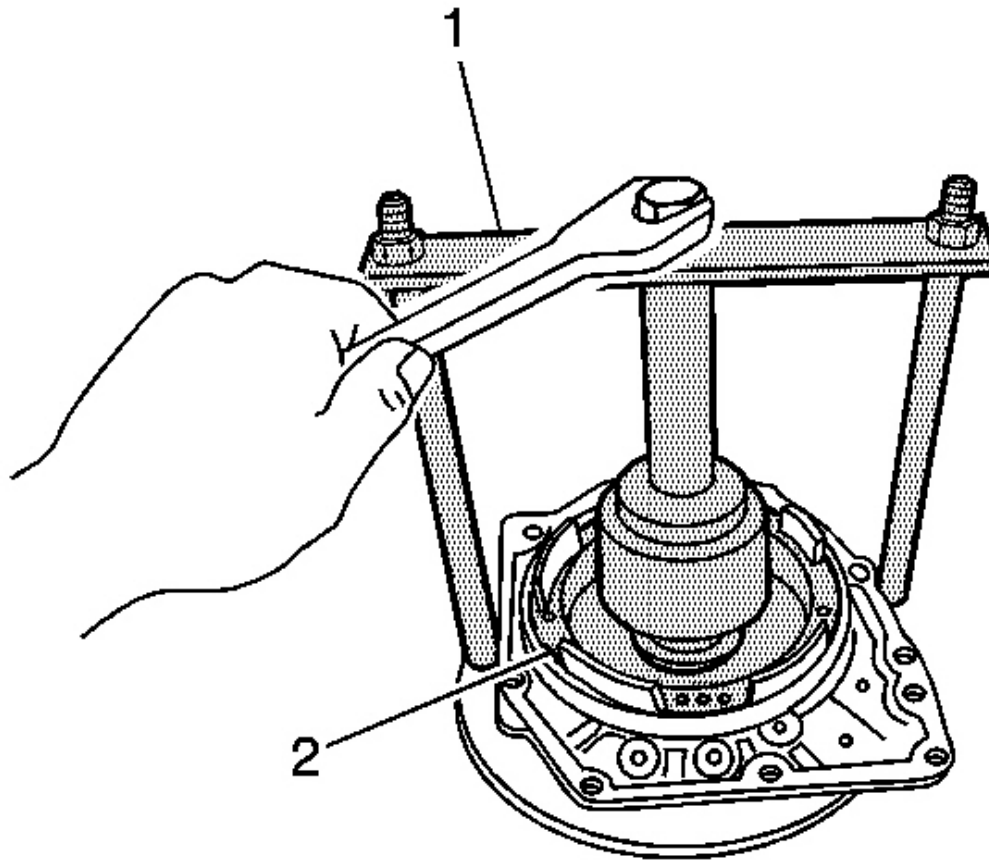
Removing Snap Ring Using A Driver, DT 46451 & DT46454
